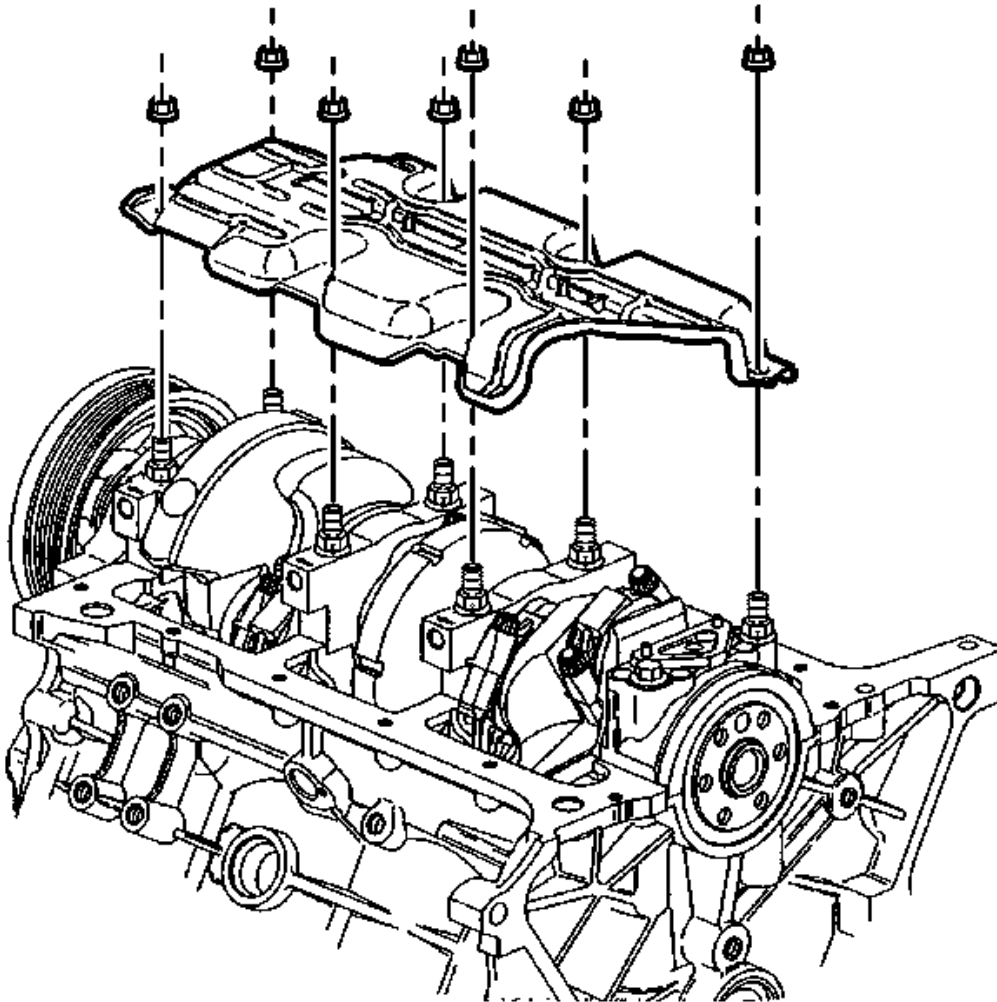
View Of Crankshaft Oil Deflector & Nuts
